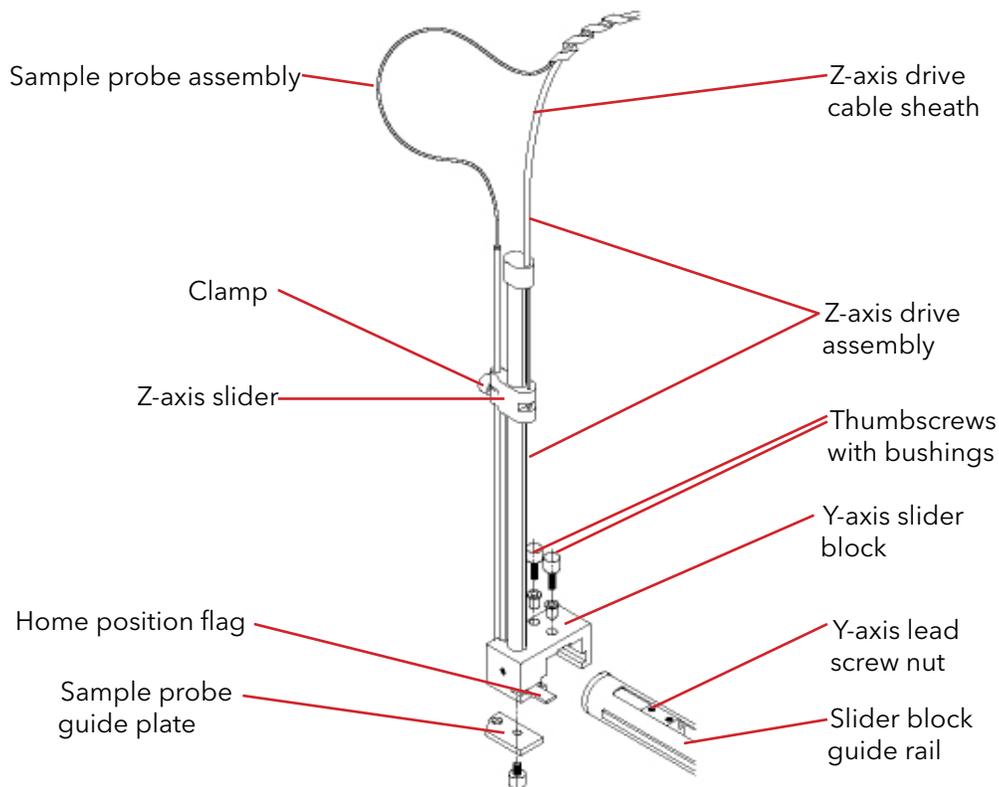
Z-Drive Assembly on Autosampler Arm
